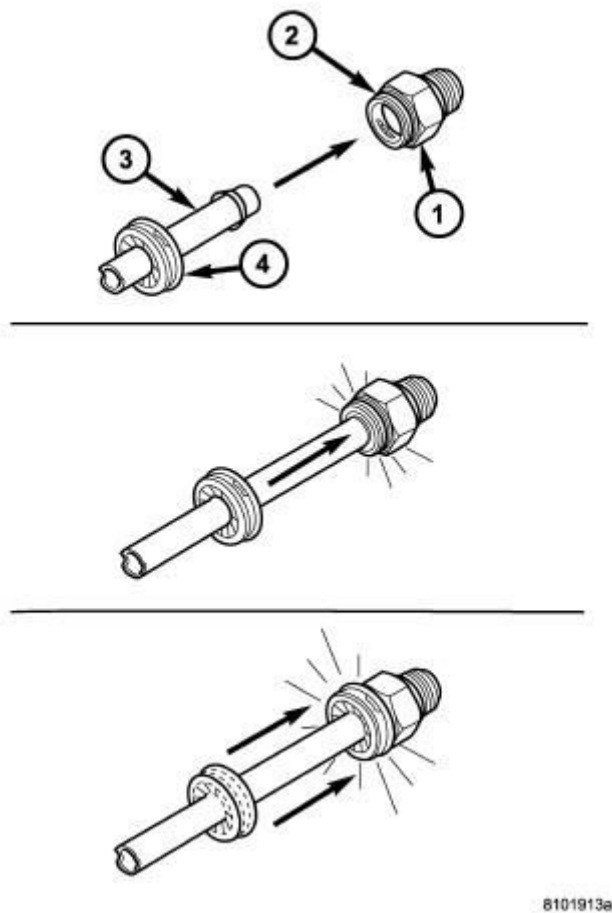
Oil Cooler Line Quick Connect Fitting - Assembly
